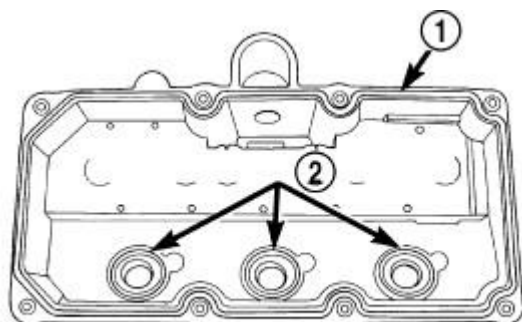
Cylinder Head Cover Gasket and Spark Plug Tube Seals
